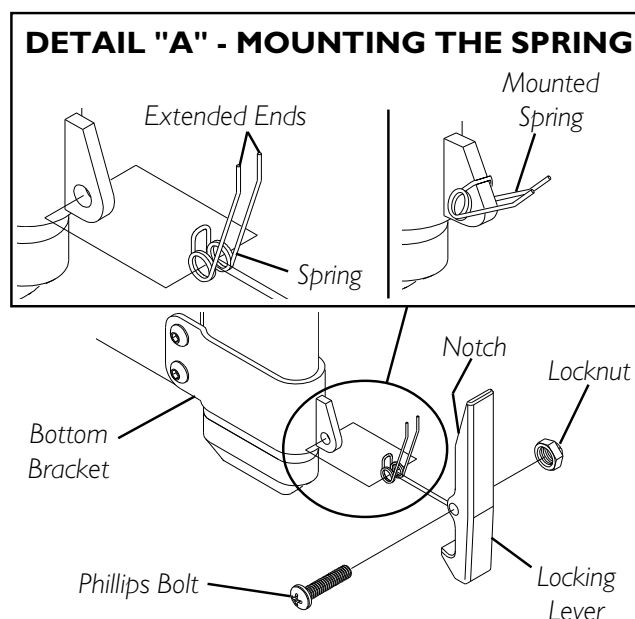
REPLACING THE T-ARM LOCKING LEVER
